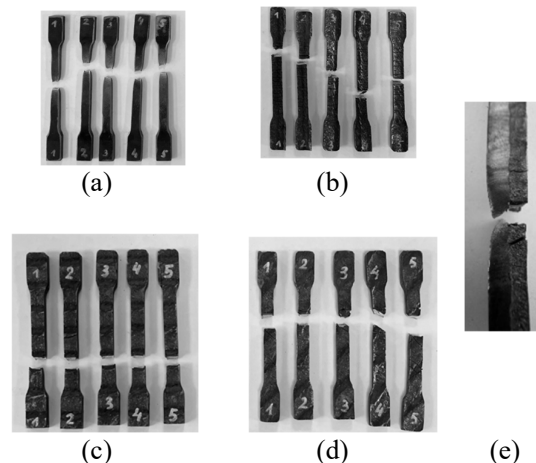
Broken specimens after uniaxial tensile tests (a) – (d); detail view of broken specimen (e).
